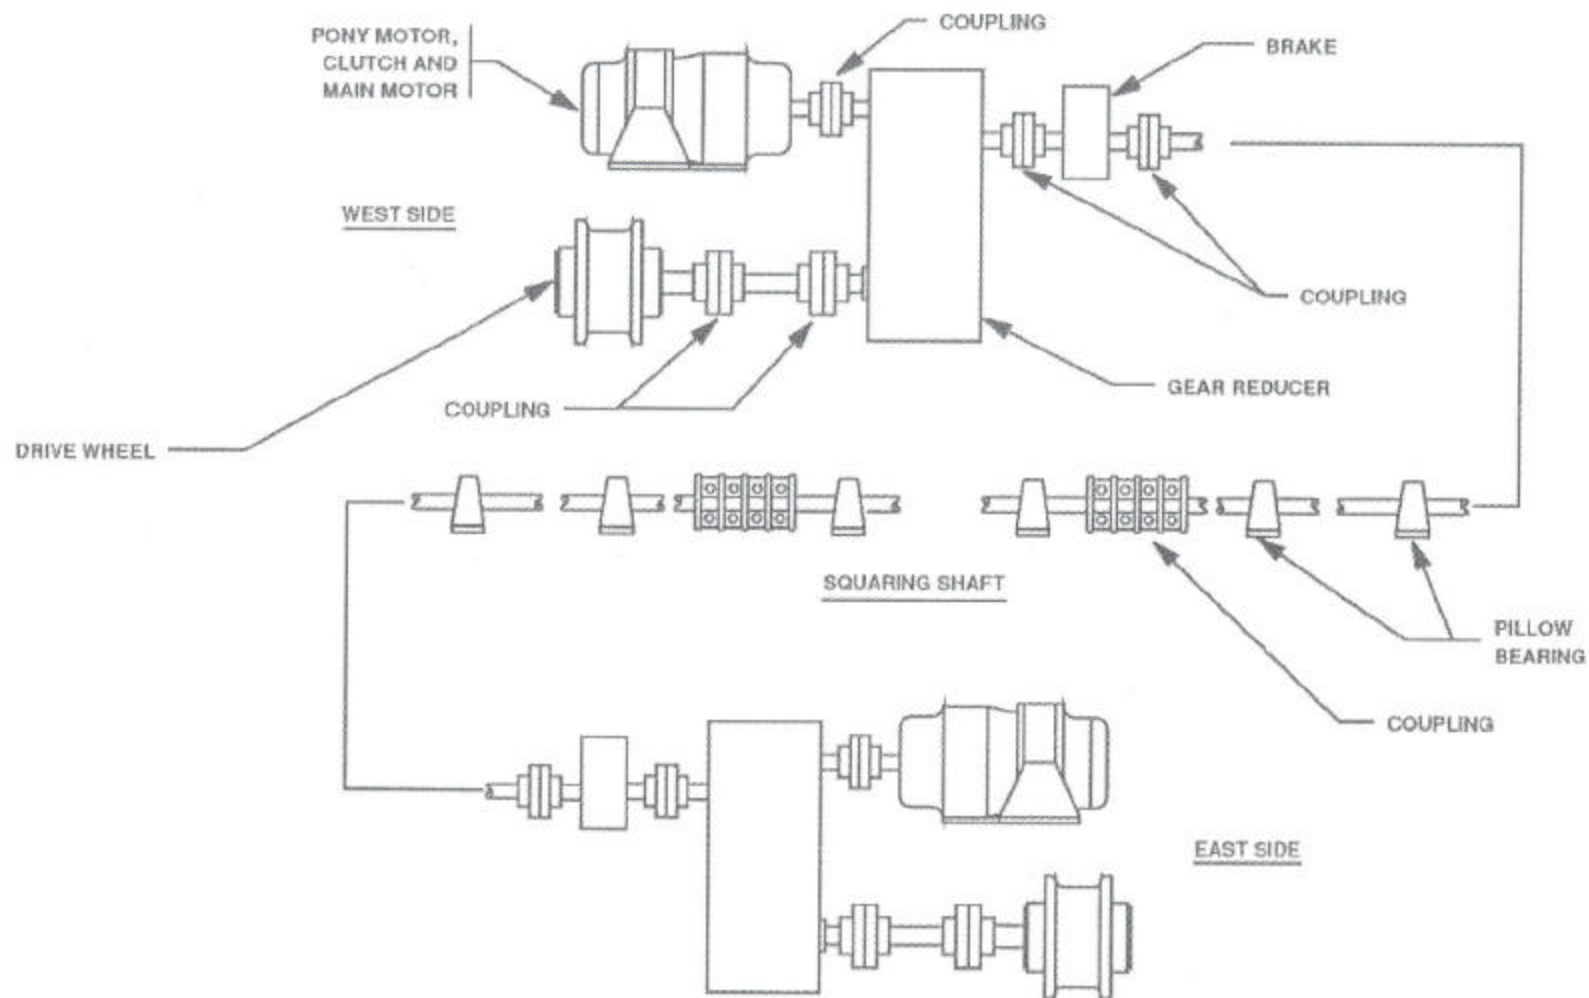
30-Ton Bridge Cranes, Bridge Drive Assembly
